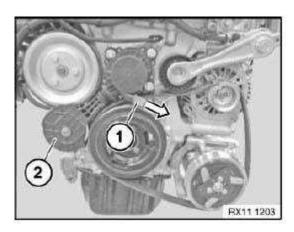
Belt Tensioner, Wrench, Drive Belt, Locating Pin And Removal Directions Courtesy of BMW OF NORTH AMERICA, INC.
